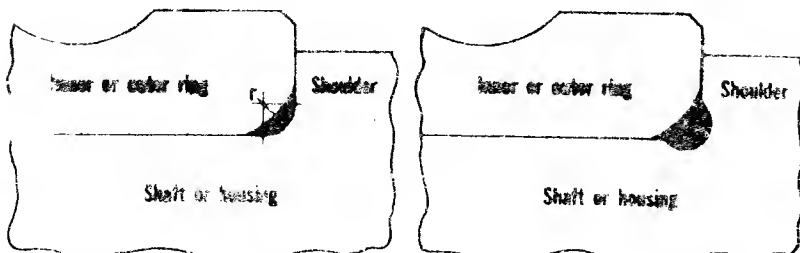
Two methods of providing clearance for bearing corner. (left) radius r is maximum that bearing corner will clear, (right) undercut fillet and more accurate machining of shoulder and seat, provides more accurate bearing mounting.
